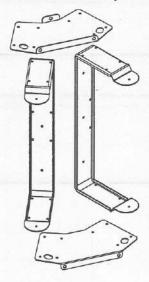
B — Assembled Horizontal Array Mounting Frame Consisting of One Mb300 Horizontal Array Kit and Two Mb200 Installation Kits
